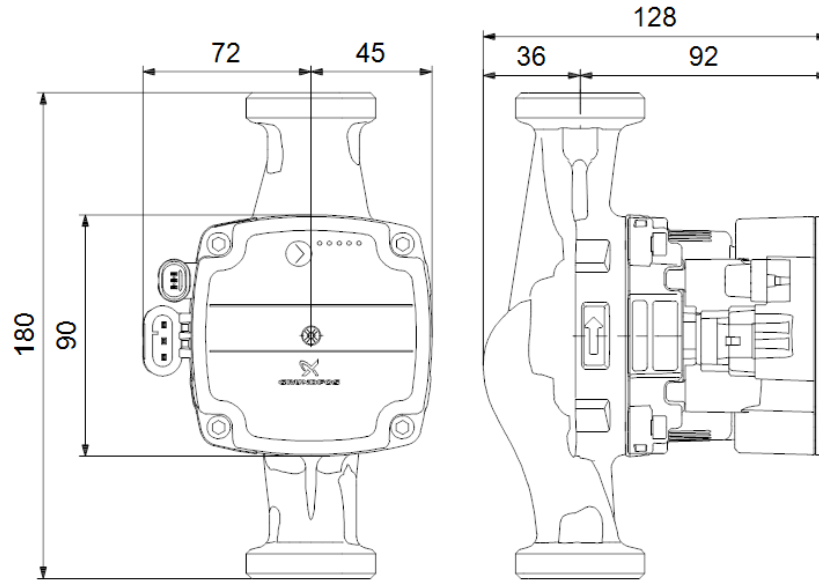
Alpha Solar circulator dimensions (mm) [33]
